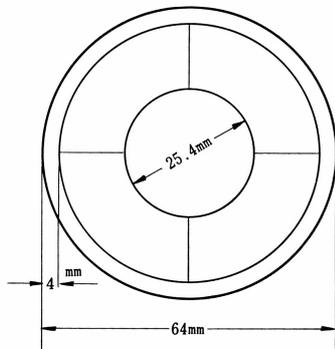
An Example of the Working Surface Divided into Five (n=5)
